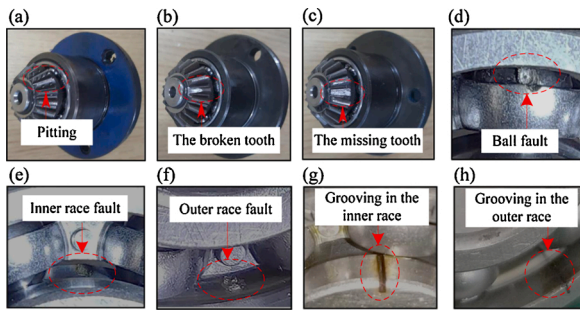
Faulty gears and bearings: (a) pitting in the driving gear, (b) broken tooth in the driving gear, (c) missing tooth in the driving gear, (d) ball fault, (e) inner race fault, (f) outer race fault, (g) grooving in the inner race, (h) grooving in the outer race.
